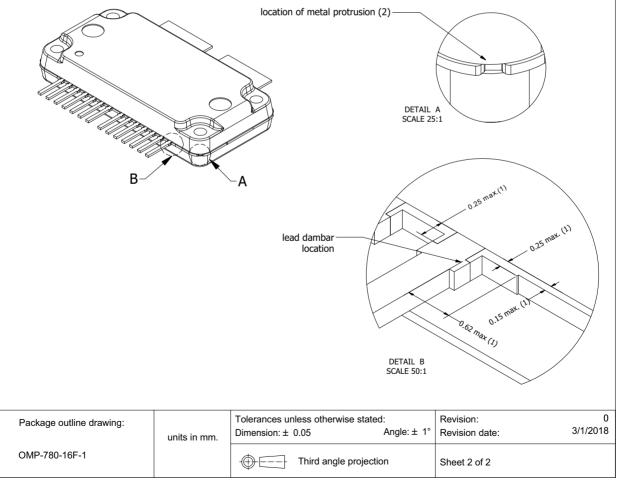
Package outline OMP-780-16F-1 (sheet 2 of 2)
